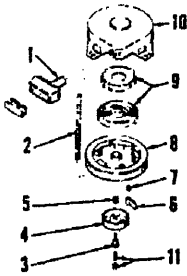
Exploded view of starter. Refer to Fig. E2-27 for installation of parts (5, 6 & 7).
